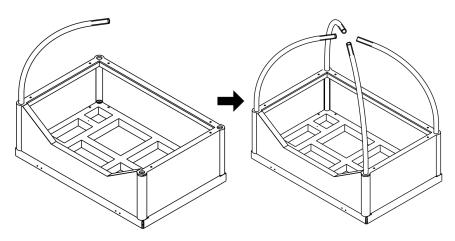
Insertion of Roll Bars into Tub and Base assembly.
